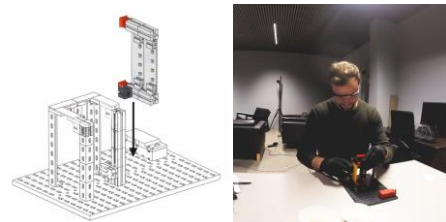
Left: Part of the assembly instructions provided to participants. Right: recorded view from participant after triggering the mounted camera using safety glasses.
